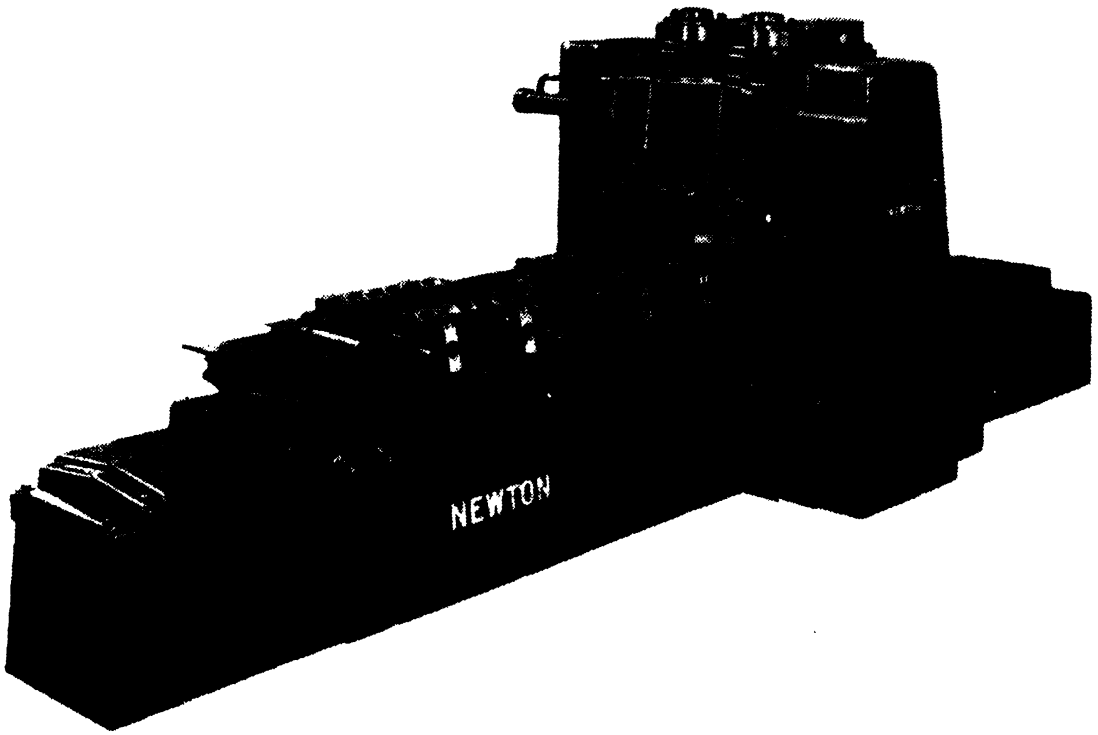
Planer-type combined milling and shaving machine. (*The Consolidated Machine Tool Corp., Newton Machine Tool Works, Rochester, N.Y.*)
